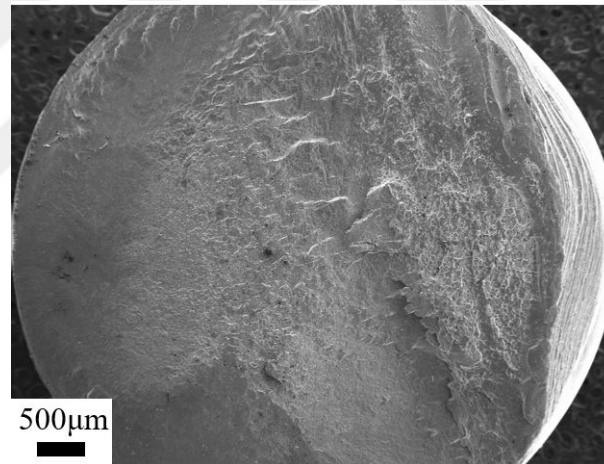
General view of the fatigue fracture surface of condition H DSS sample broken in 5.072.316 cycles, at 80% of σ_{yield} .
